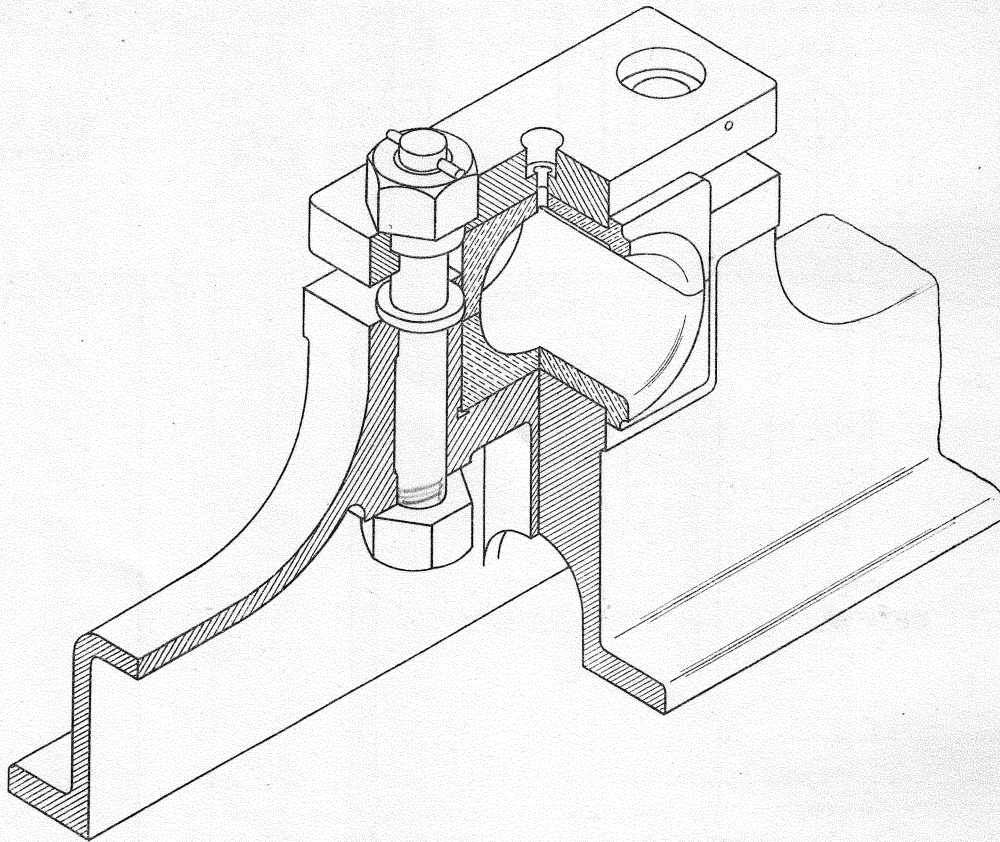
Plate XVI.—SHAFT BEARING FOR VERTICAL ENGINE.
